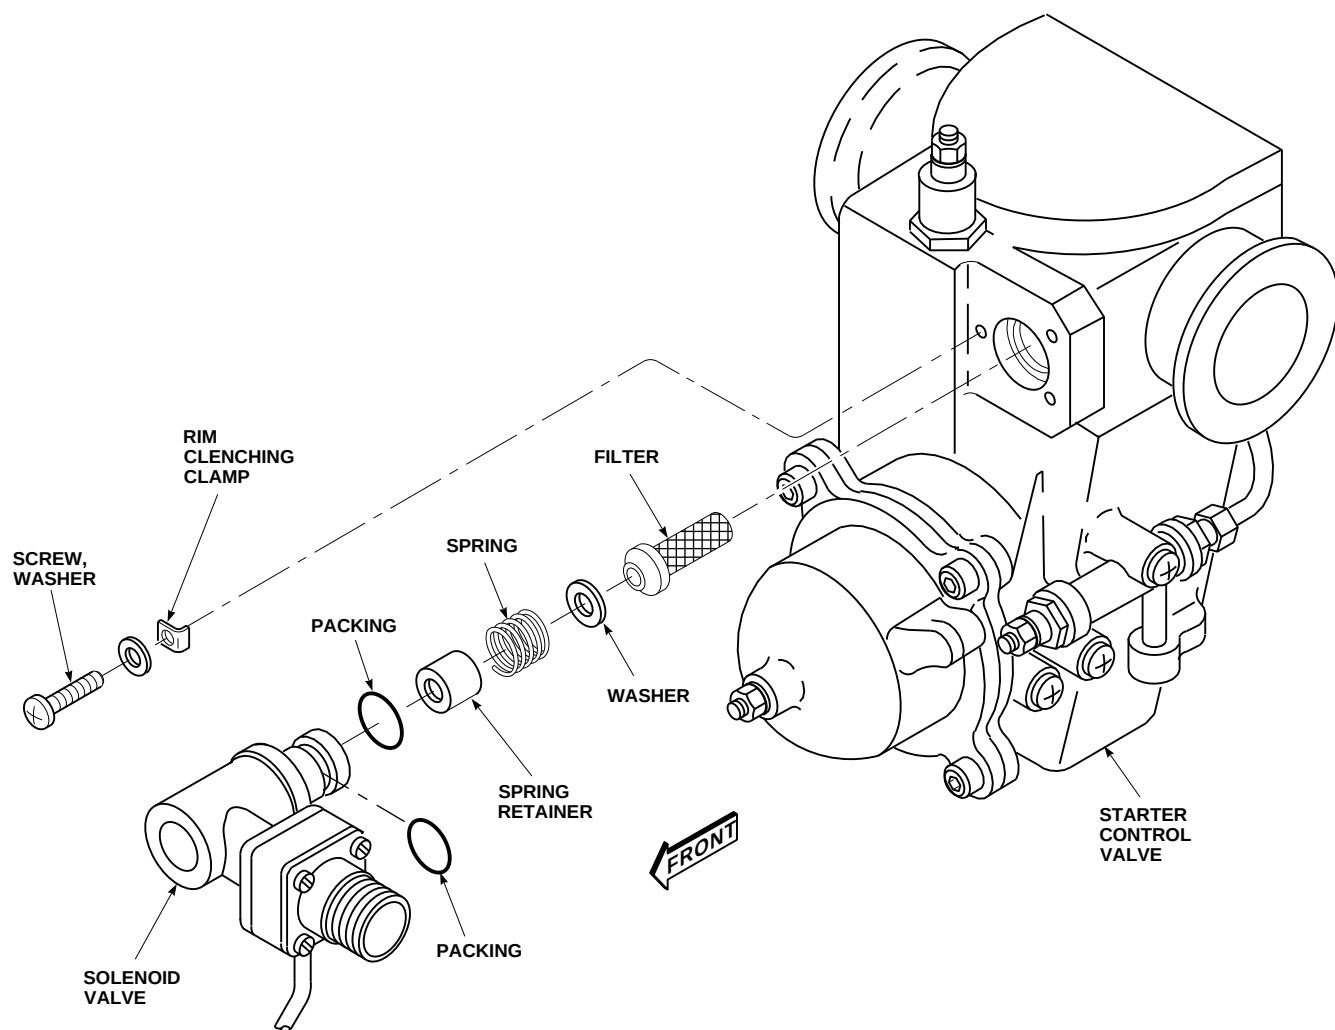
REPLACE ENGINE STARTER CONTROL VALVE (SHEET 2 OF 2)
